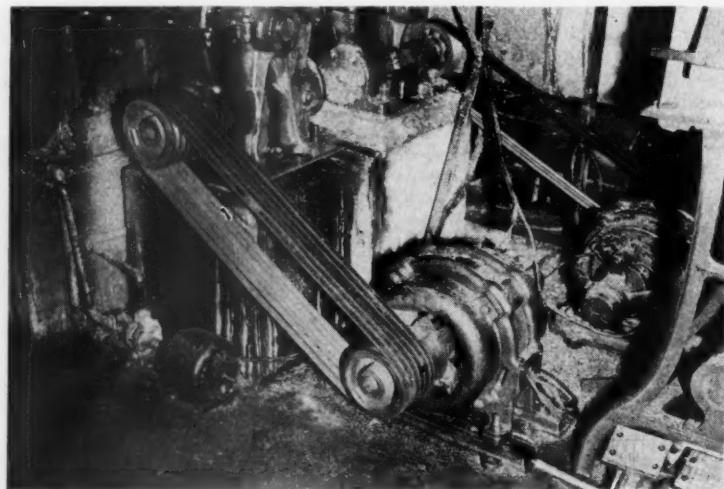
ARBOR DRIVES on milling machine are slip ring motors V-belt connected to the worm reduction gear boxes. Because of time element wiring is temporary.
